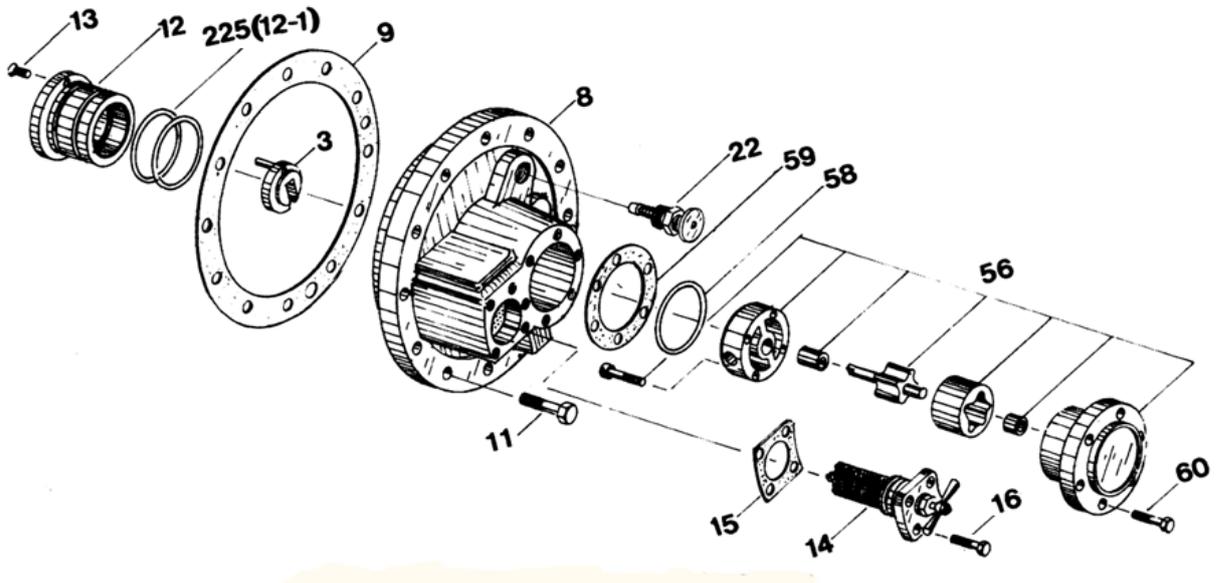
WB-type Main Bearing Head and Associated Parts
